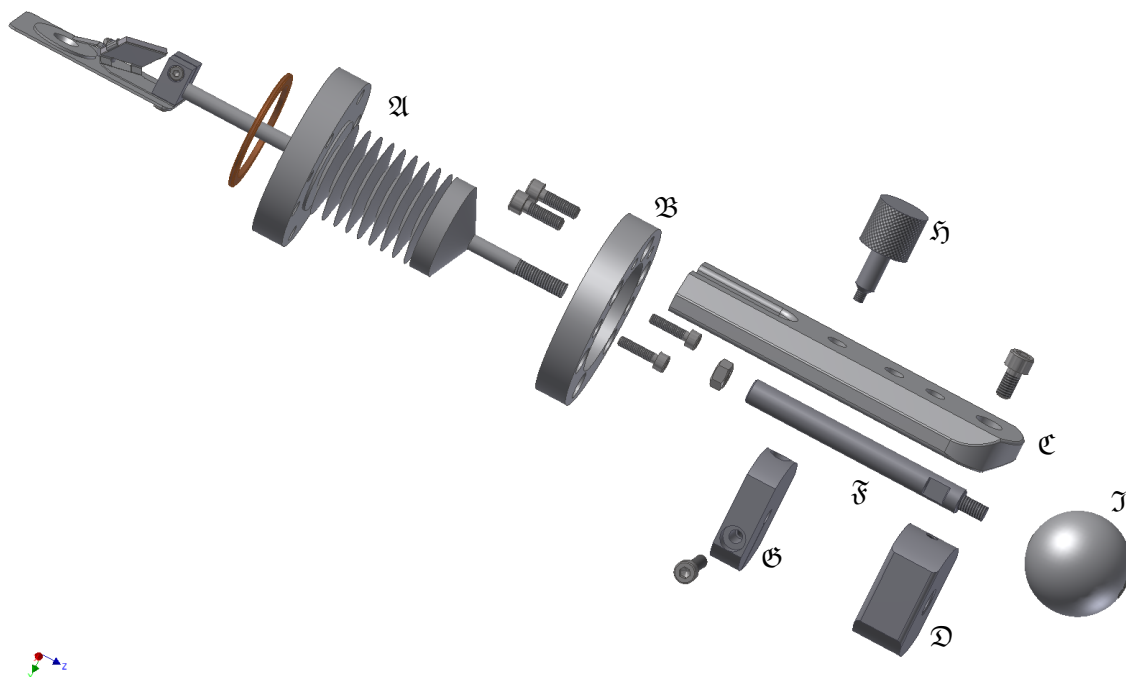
Mirror/Orifice Assembly Air Side — The modified wobble stick with its attachments from Figure 2.16 (A) carries a base plate (B) holding a track (C). The screws (not shown) to tighten the 40CF connection are accessible without removing the track. It is equipped with a guidance piece (D) holding the extension rod (E) of the wobble stick. The track has three distinct resting positions: laser, molecular beam and valve operation. The wobble stick is held by a clamp (G) which can be easily fixed in these positions with a knurled screw (H). A knob (F) at the end of the extension rod provides user friendly handling.
